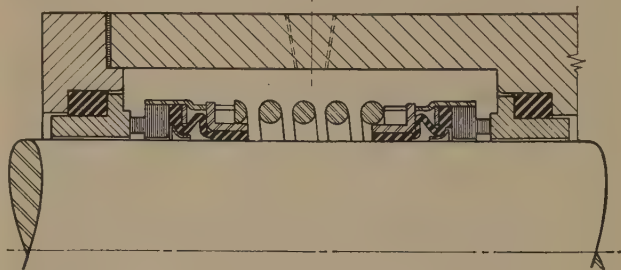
TYPICAL DOUBLE-SEAL CONSTRUCTION. LUBRICATING OR COOLING LIQUID IS PUMPED THROUGH STUFFING BOX AT PRESSURE 10 TO 20 PSI GREATER THAN PUMP DISCHARGE PRESSURE
